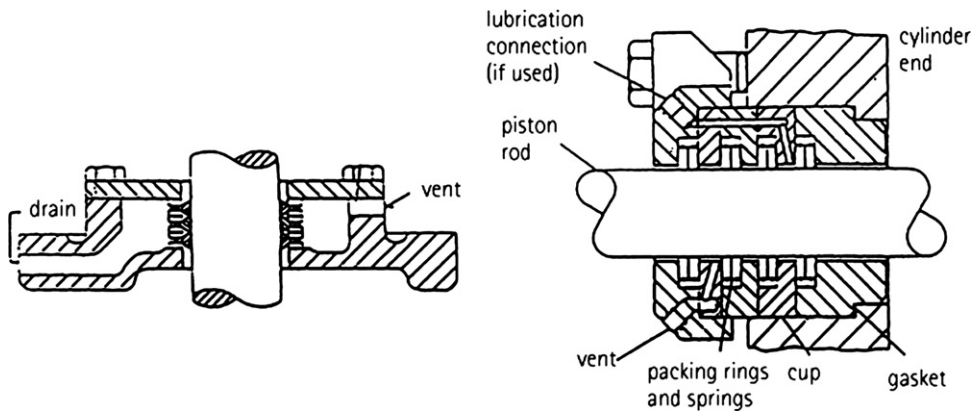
• Left: Oil scraper ring arrangement for 9" & 11" ESHV, HSE units; Right: Piston rod packing (Courtesy of Dresser Rand)
